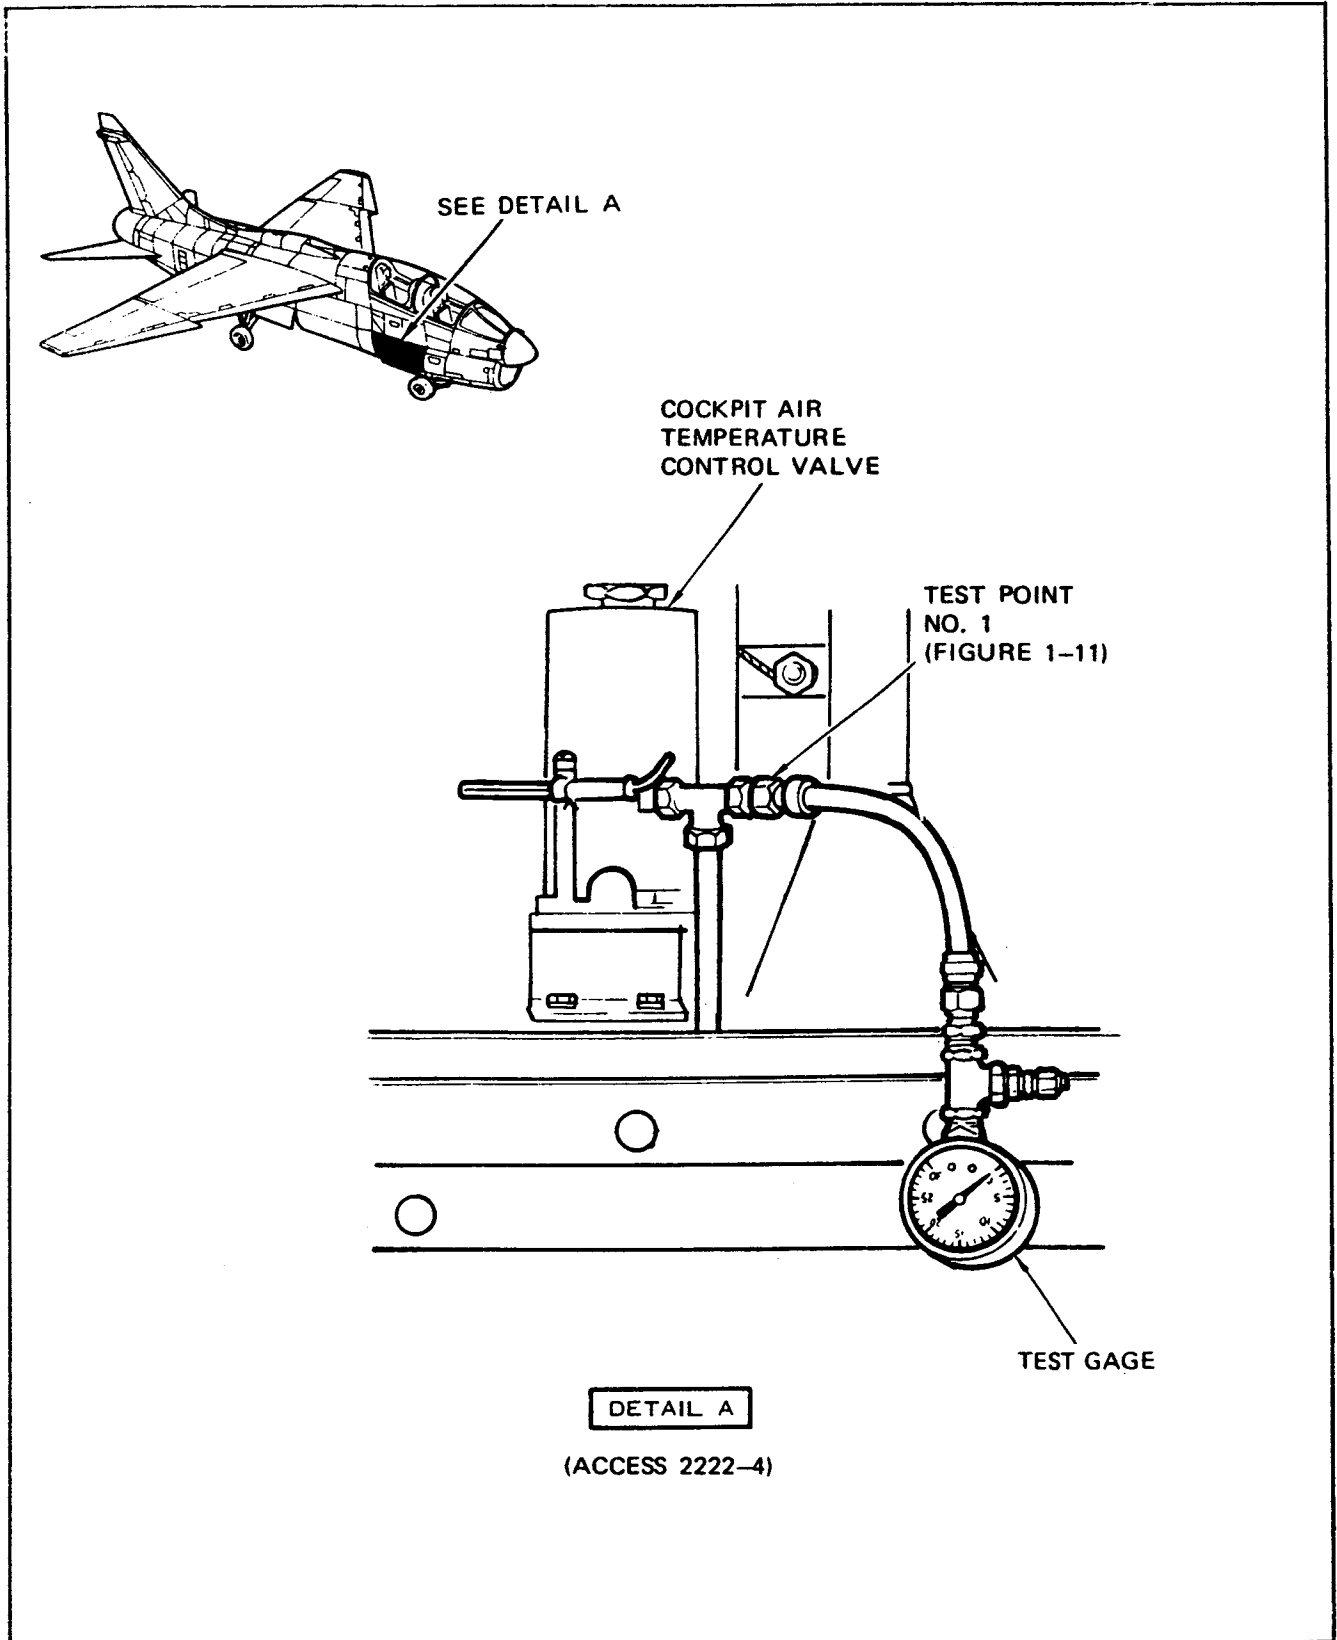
Test Gage Placement (Sheet 1 of 7)
